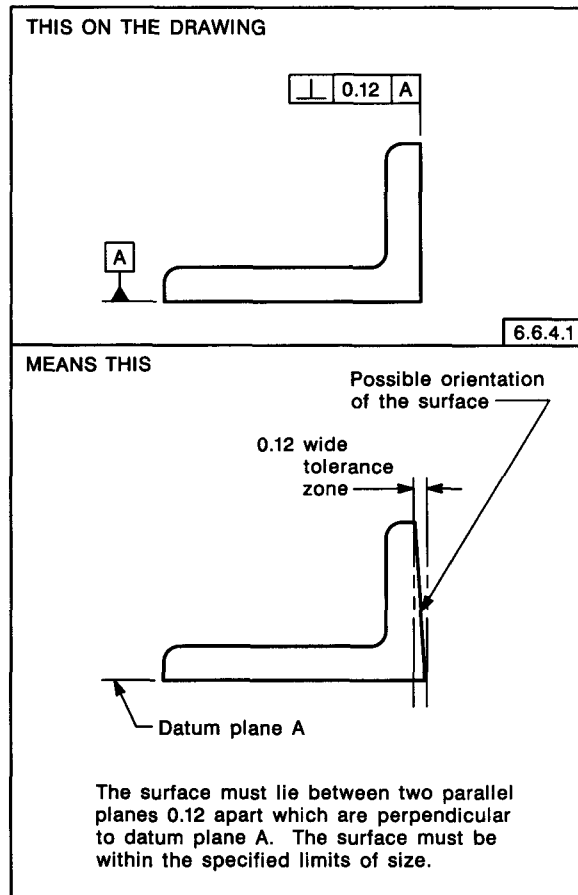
SPECIFYING PERPENDICULARITY FOR A PLANE SURFACE
